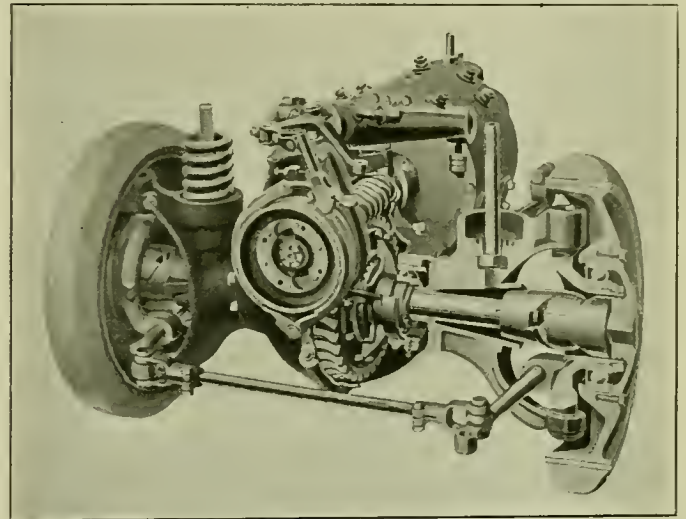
Driving Axle Equipped with Duplex Compensating Suspension
